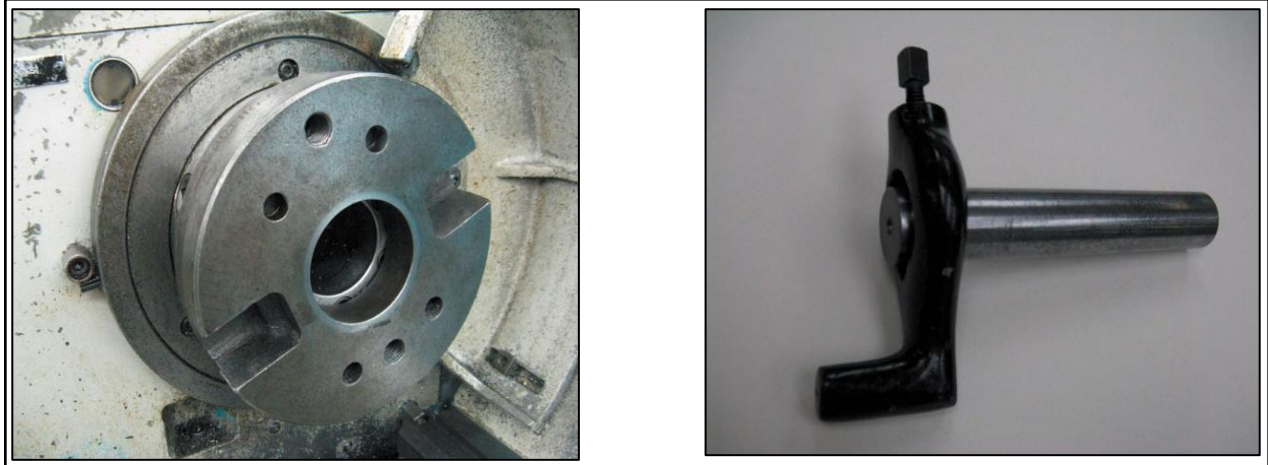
Left: Drive plate on the spindle nose of a lathe; Right: Lathe dog on a workpiece
